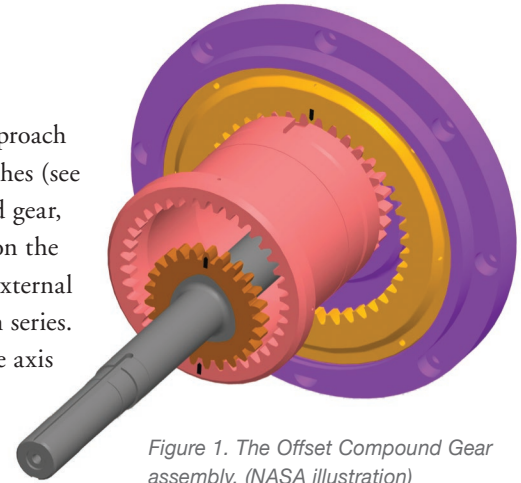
The Offset Compound Gear assembly. (NASA illustration)
